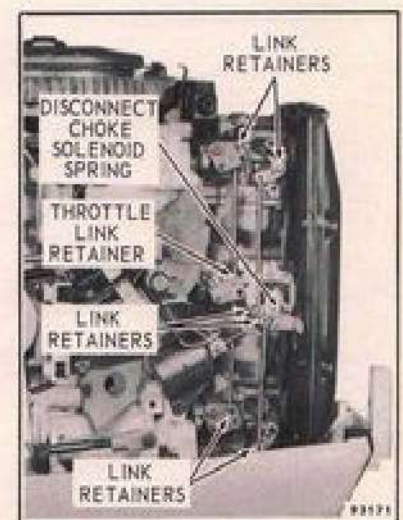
Choke Solenoid Spring, Throttle and Choke Links
